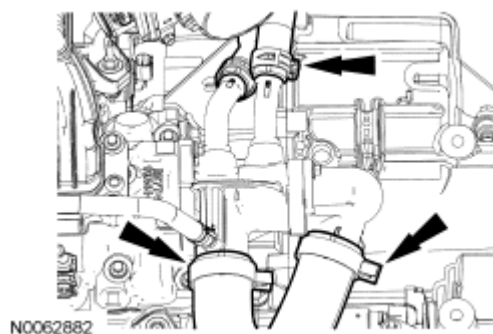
Identifying Upper Radiator Hose, Lower Radiator Hose And Heater Hose
